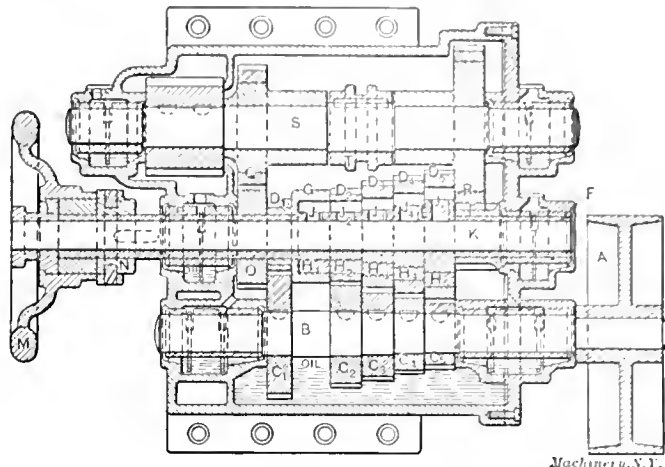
Gear Box with Constant Speed Pulley Drive.
